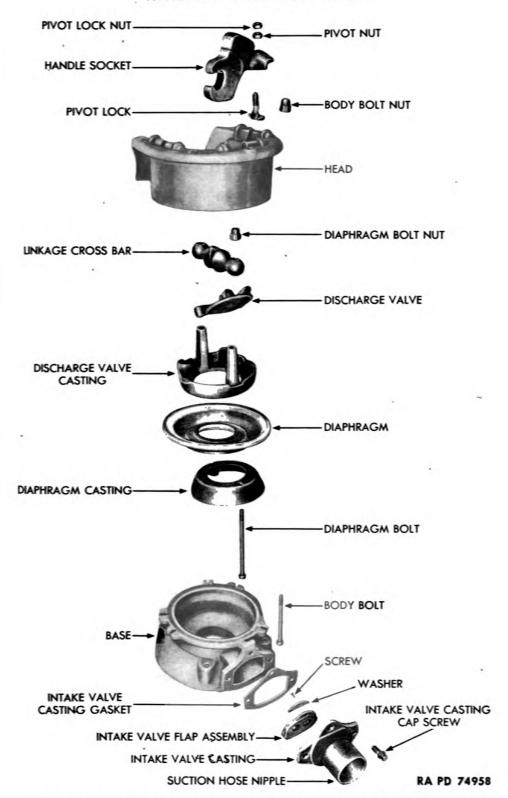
Hand-operated Diaphragm Pump - Exploded View
